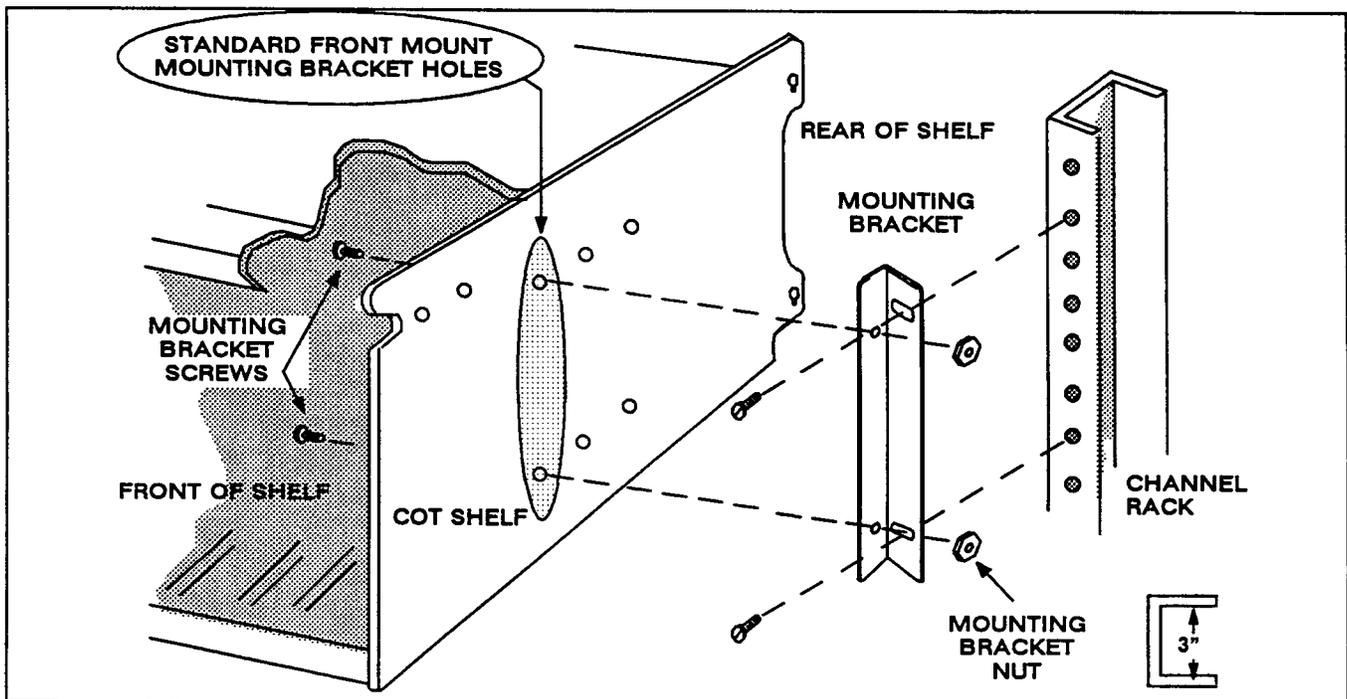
Shelf Mounting Bracket Position for Standard Front Mount
